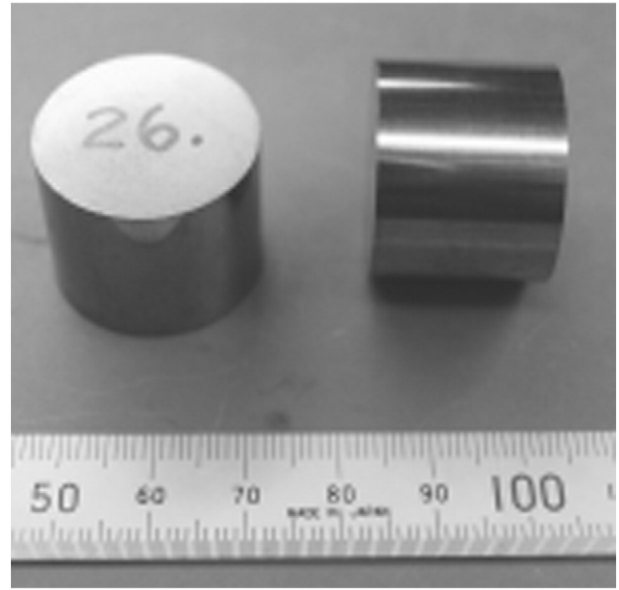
Photograph of a cylindrical specimen (HVC specimen, 7.4 g/cm^3).
